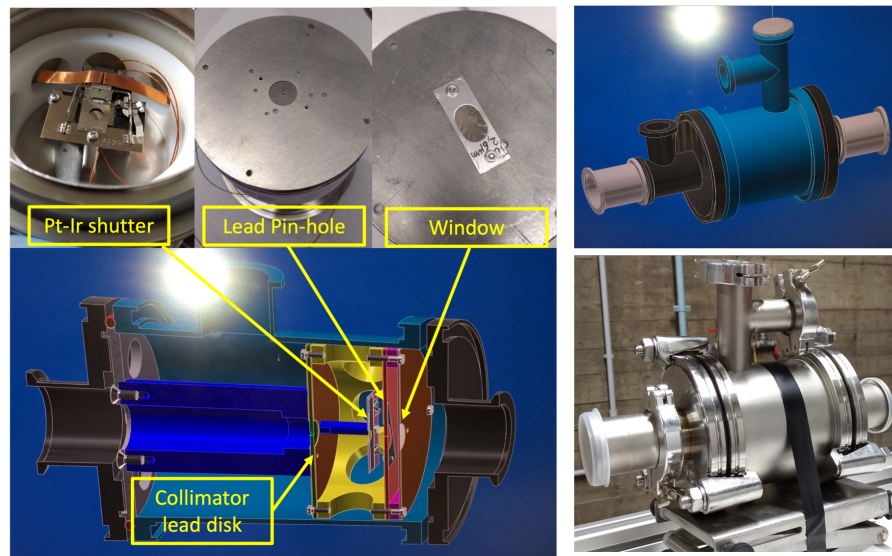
Pictures and mechanical drawings of the holder for the pin-hole CCD system, which houses the lead pin-hole, X-ray shutter, window, and collimator.
